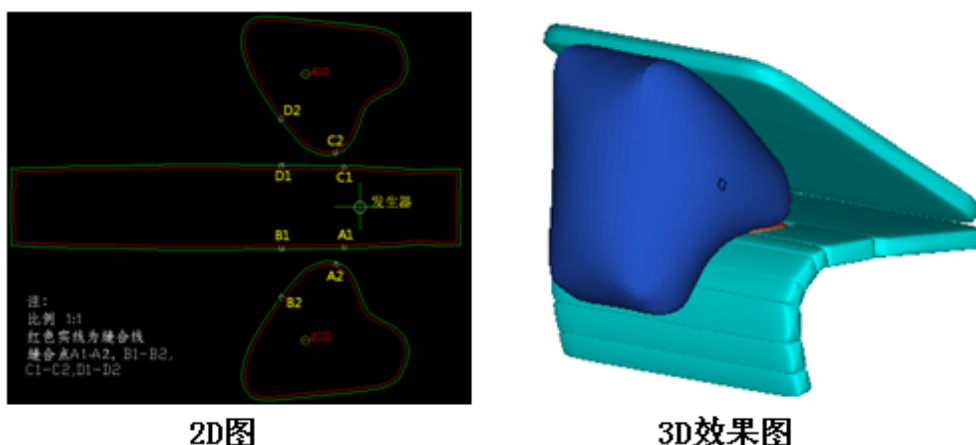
The original 2D&3D drawing of platform PAB airbag shape
